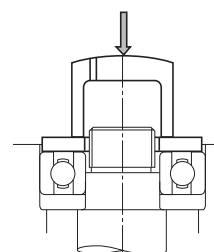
Simultaneous Press Fitting of Inner and Outer Rings
